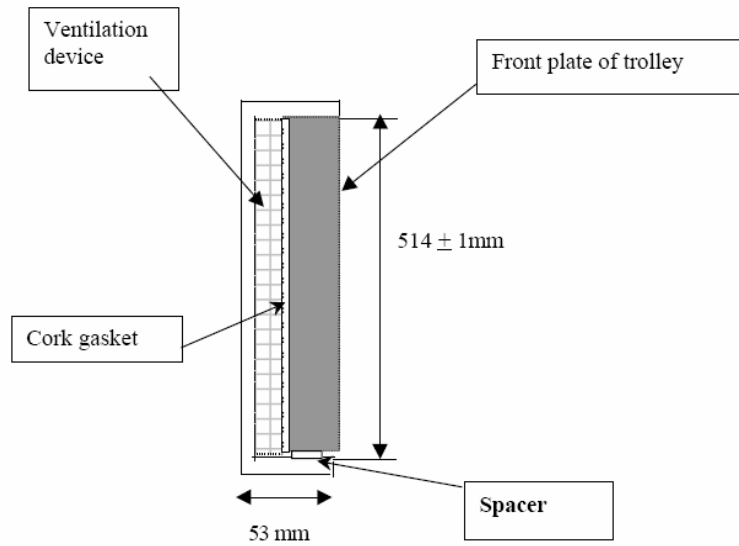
Attachment of backplate to ventillation device and trolley back plate
